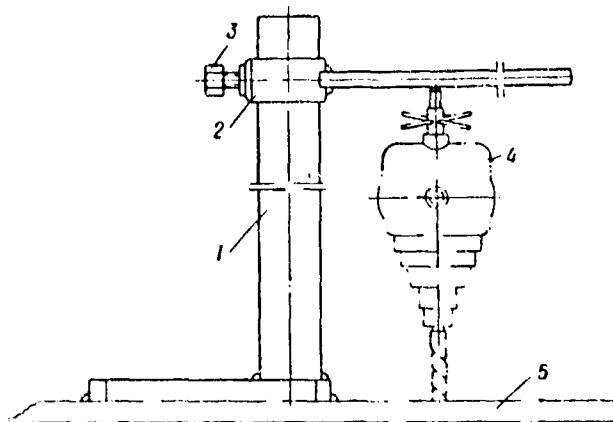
Supporting Bracket for Drilling Holes Under Water:
